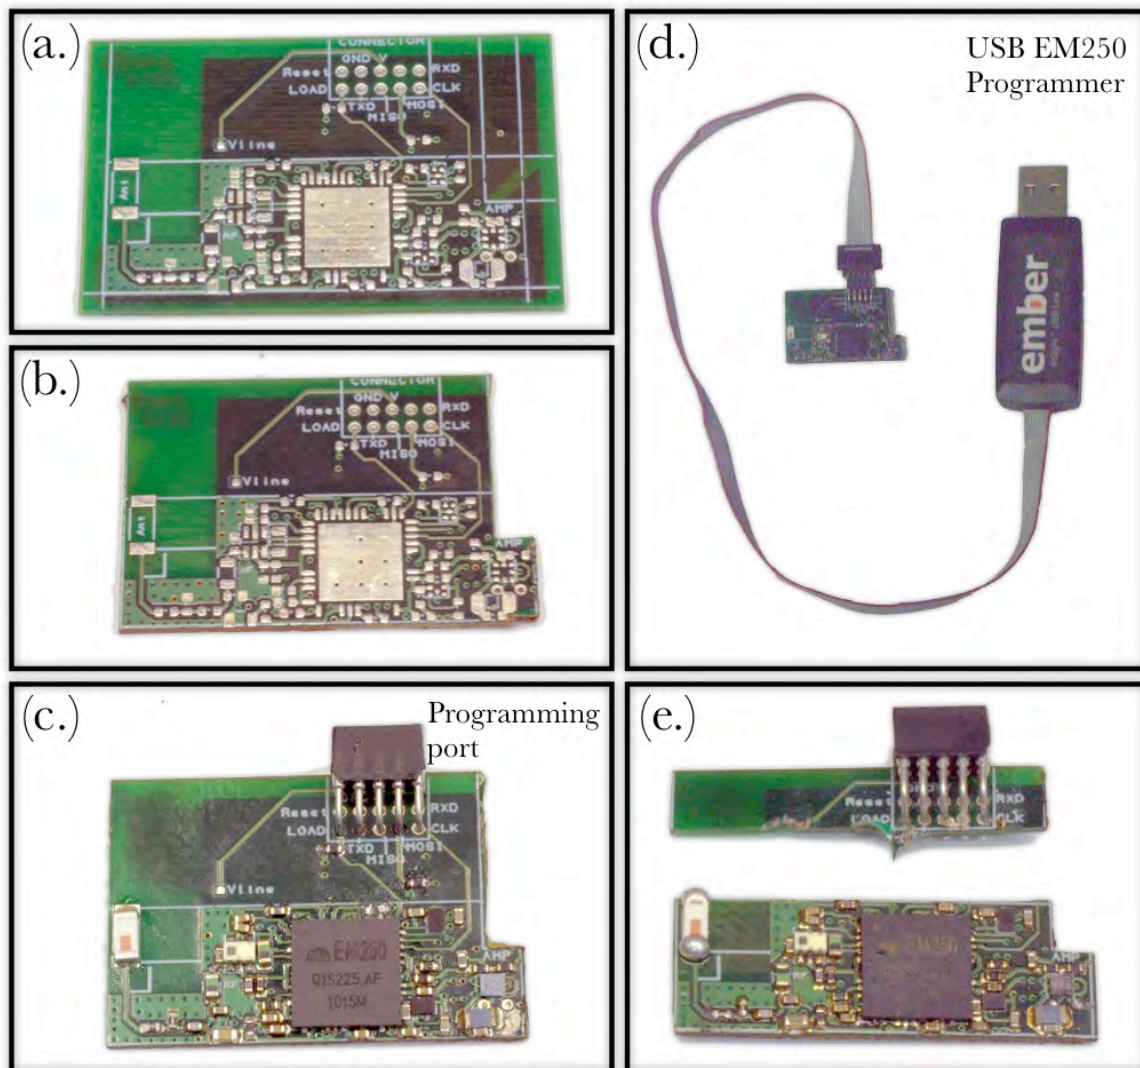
PCB fabrication process. (a.) PCB as supplied by the manufacturer. (b.) Pre-cut milling step. (c.) All surface mount components added to PCB and reflowed. (d.) USB programming connector attached to device. (d.) Final cut severs the programming connection and brings the PCB to its final size (9 mm × 26.5 mm).
